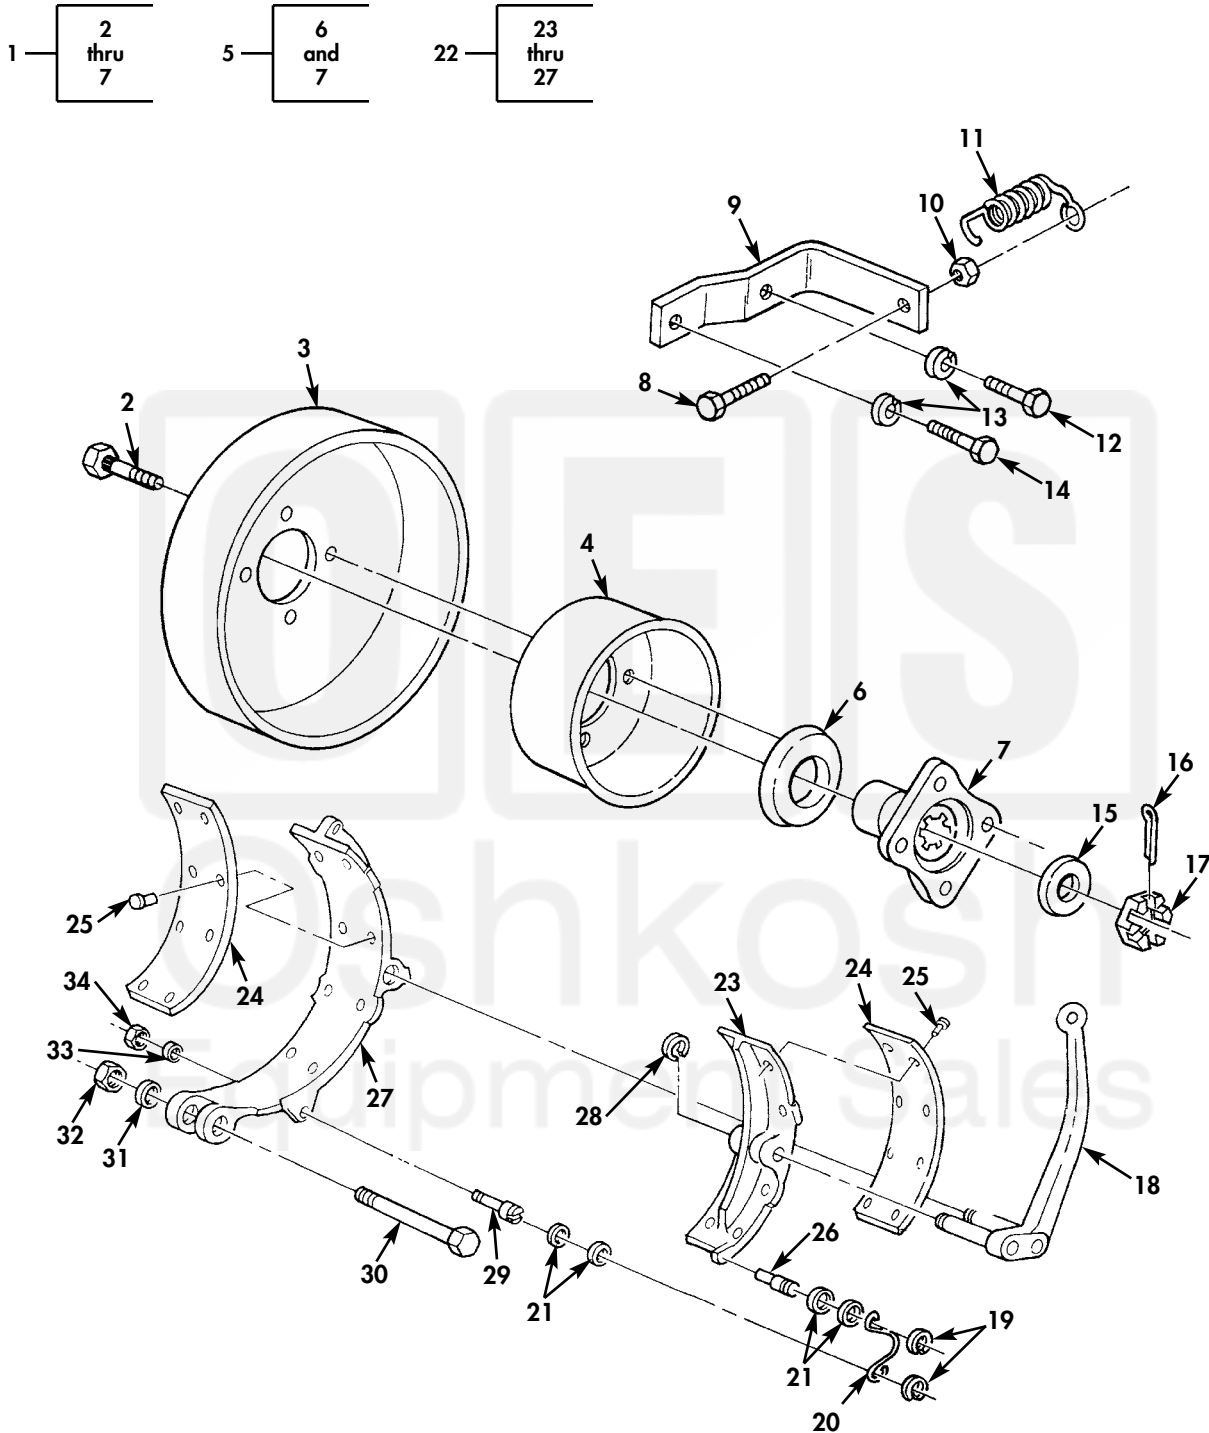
Parking Brake Drum, Shoes, and Related Parts.
